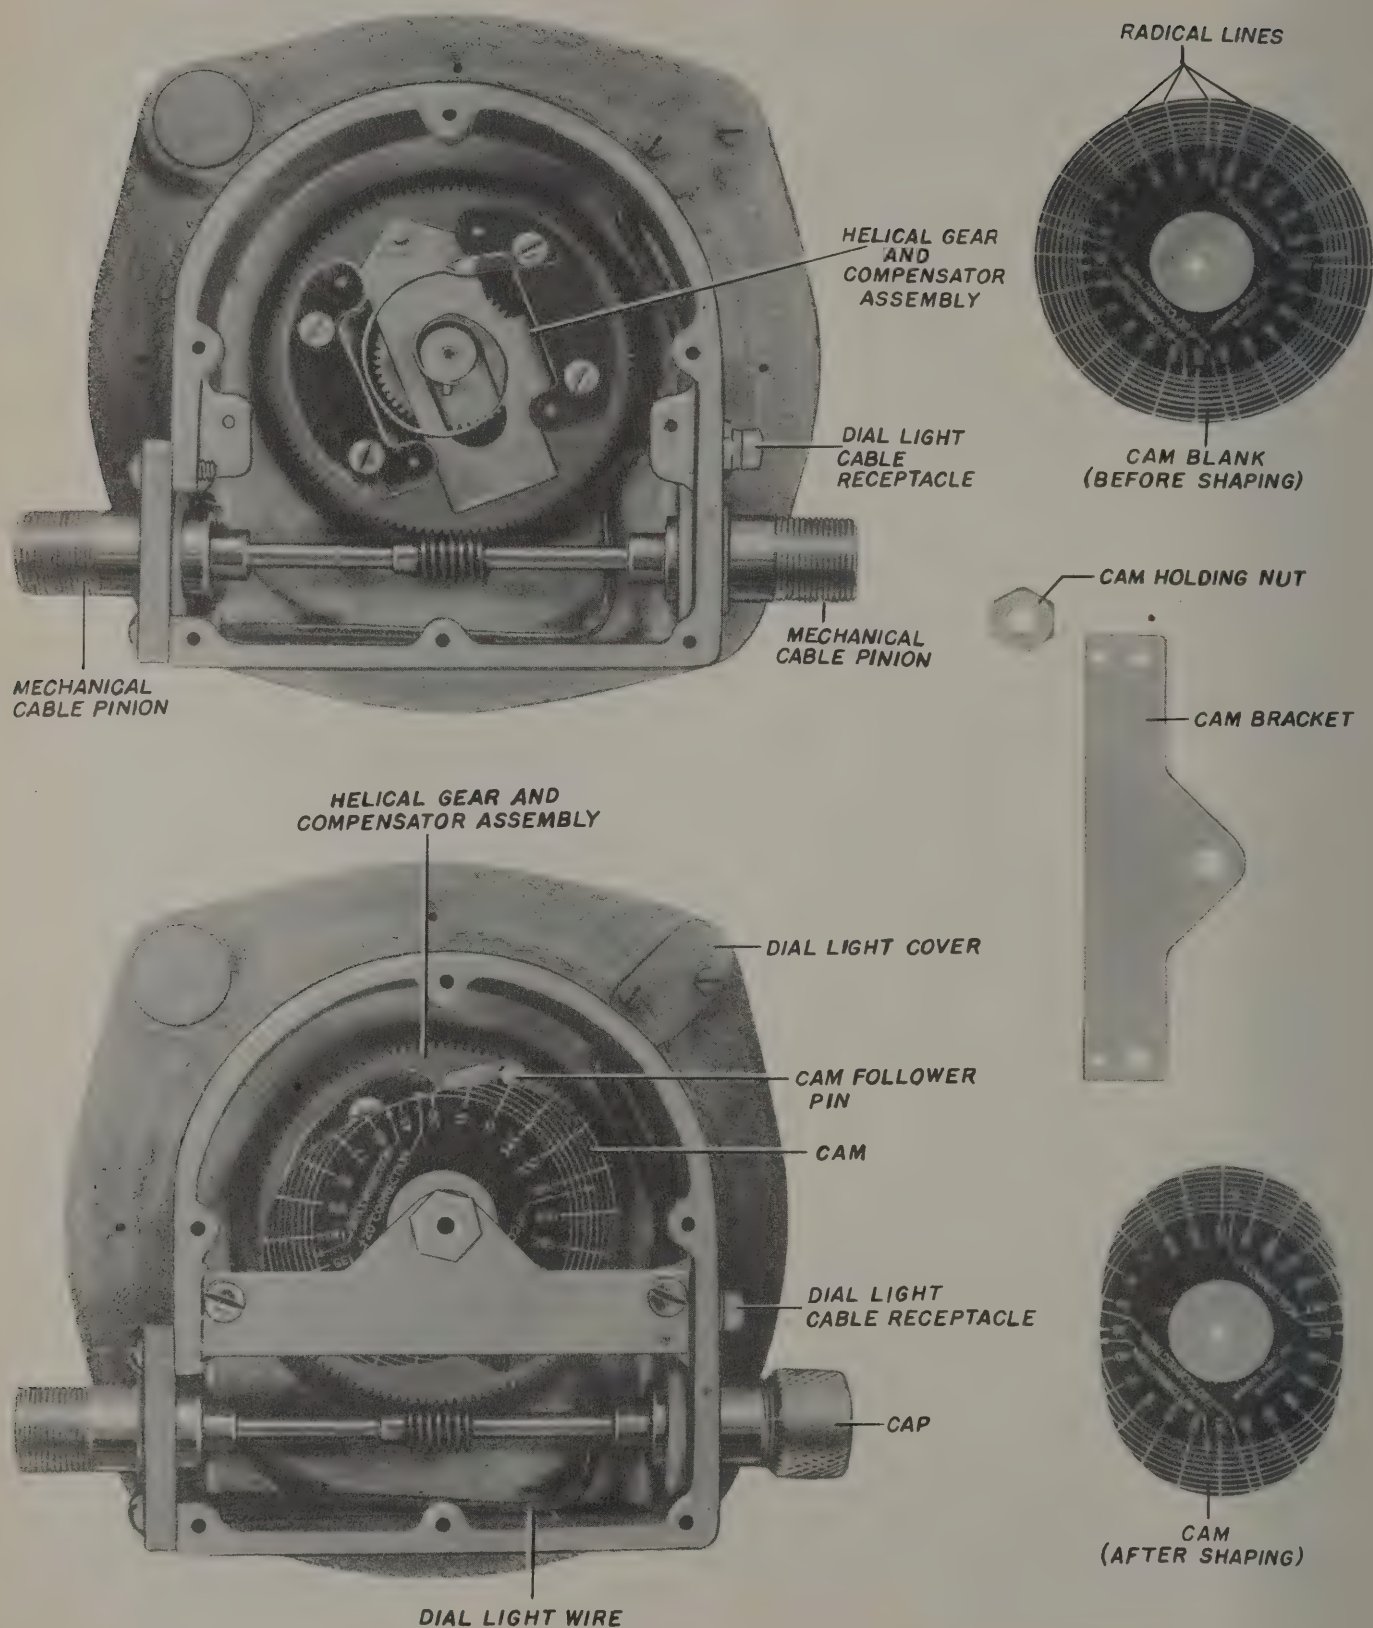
Type MN-22A Azimuth Indicator, Disassembly
